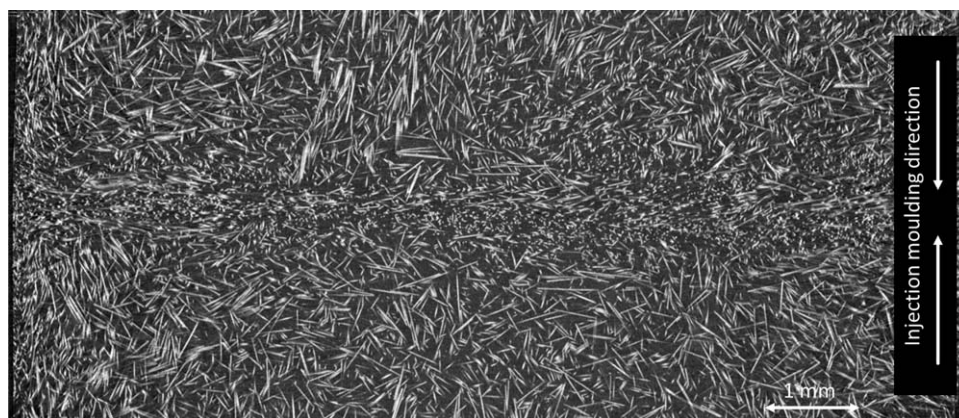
CT-photograph of a nontested standardized testing specimen with weld line (front view).
